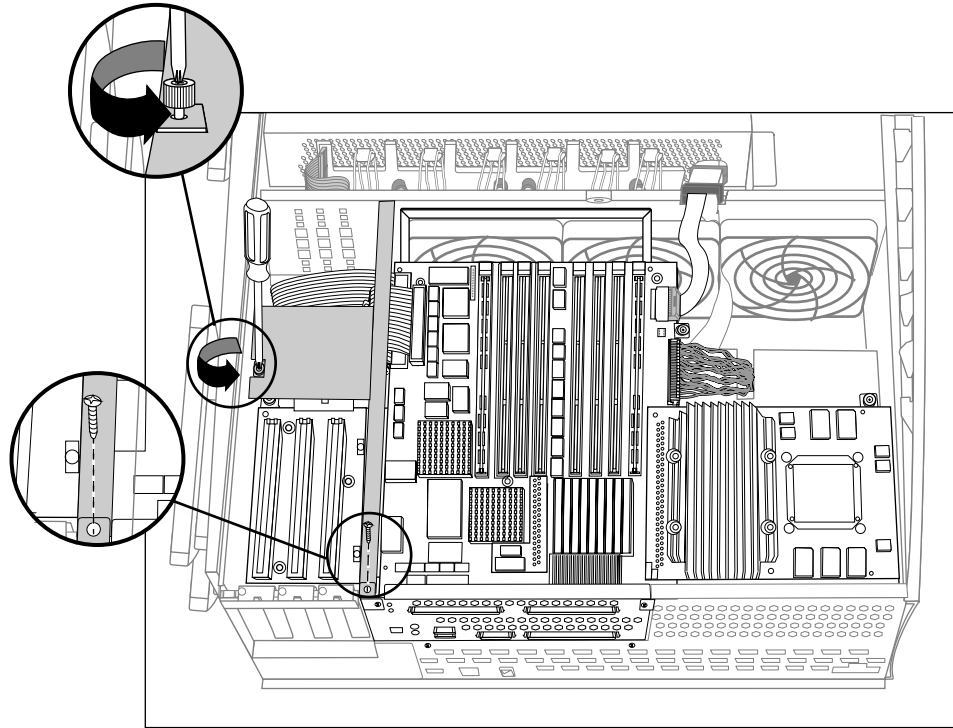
Unfastening the PCI Plenum Divider Sheetmetal
